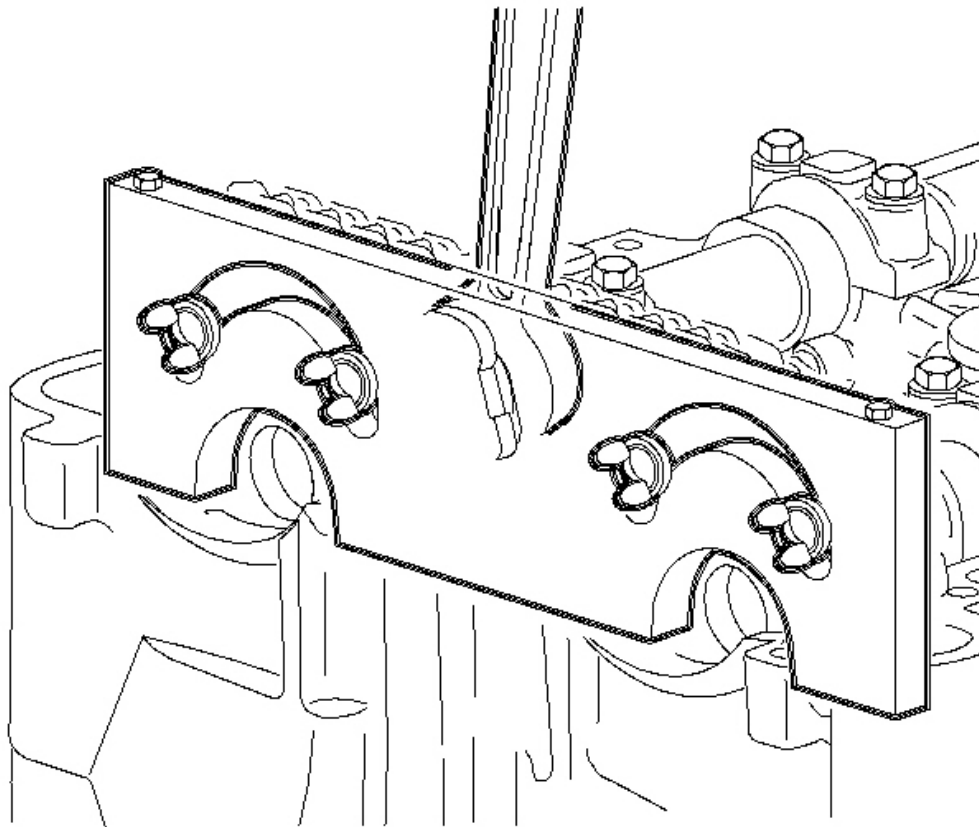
Rotating Camshafts With 24 mm Open End Wrench To Align The Camshaft & Sprockets
